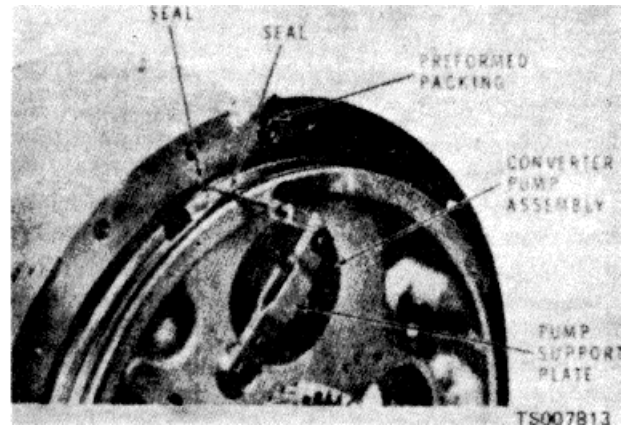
Torque Converter Housing Showing Pump and Seals
